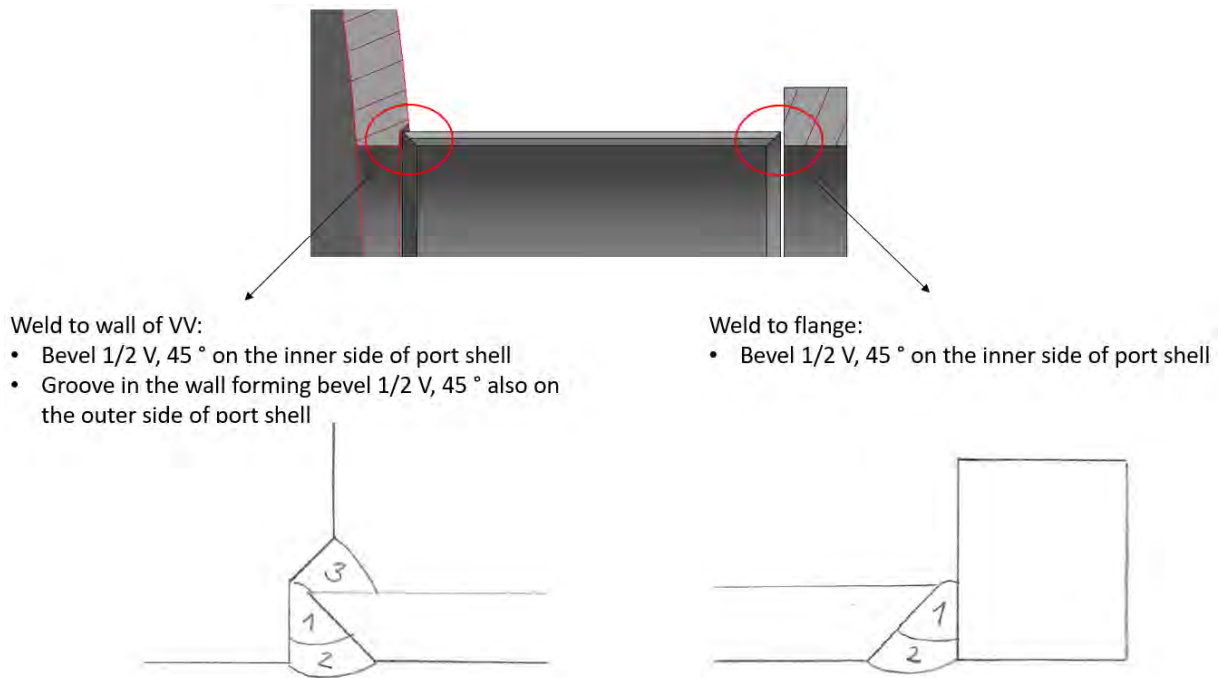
Preparation of weld bevels and corresponding schematics of weld passes layout for joints of the MN port shell to its flange and to the VV wall
